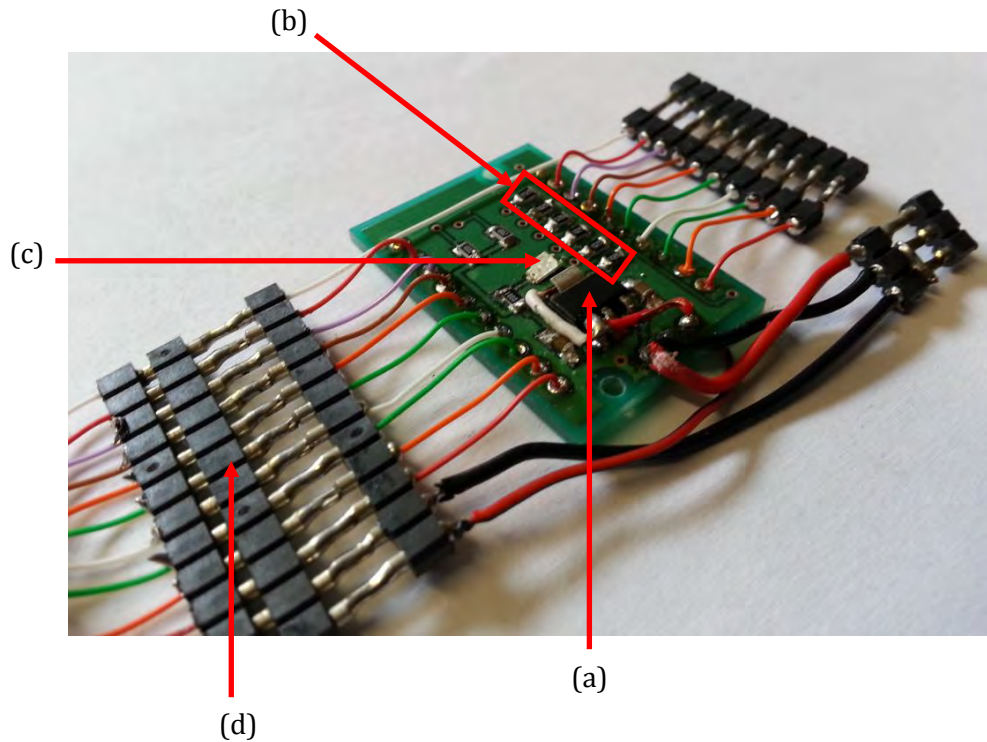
A picture of the Level shifting PCB showing (a) the 3.3 V voltage regulator, (b) a bank of resistor dividers, (c) an indicator LED and (d) electrical tulip wire-to-wire connectors.
